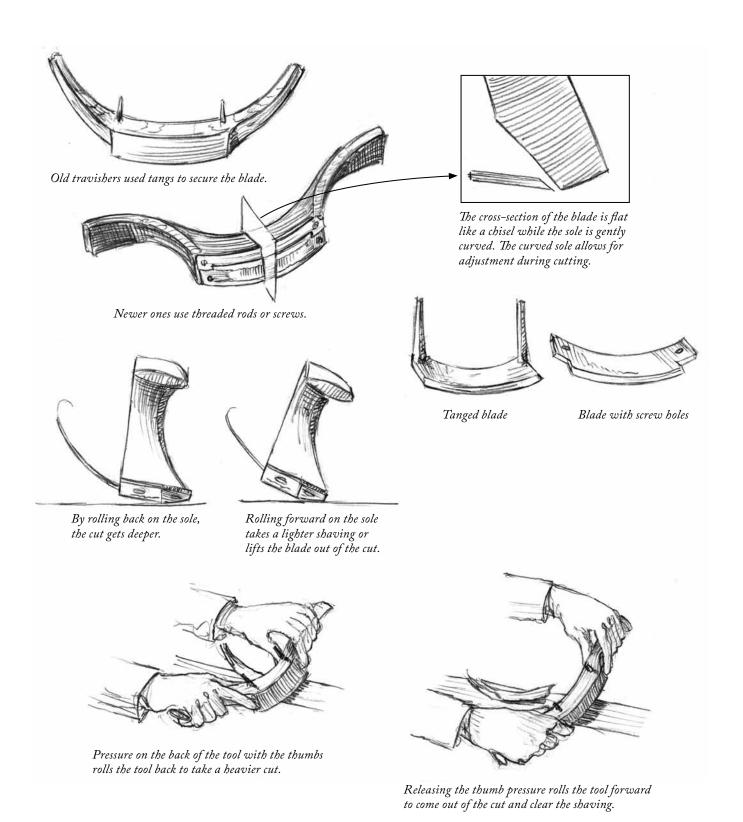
Some tools can be tilted to take a heavy or light cut.
